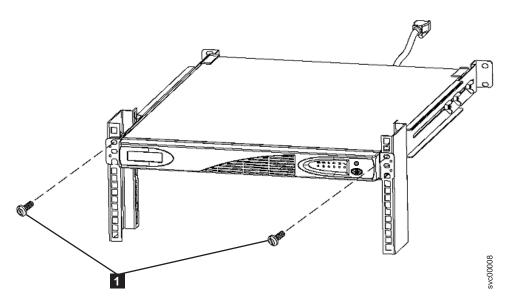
Mounting screws for the 2145-1U uninterruptible power supply
